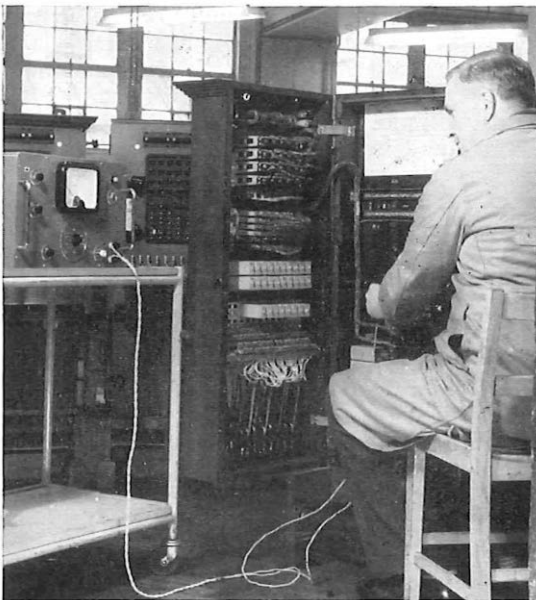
Testing a Factory repaired floor pattern PBX switchboard
